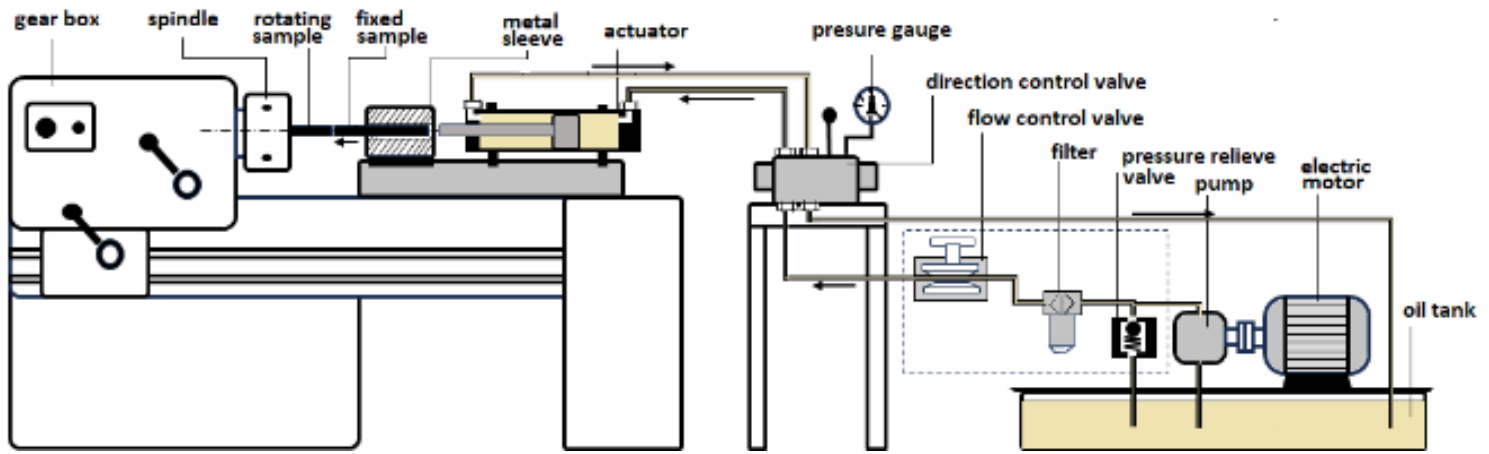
The lathe machine was equipped with a hydraulic actuator and a hydraulic pack unit for the RFW process.
